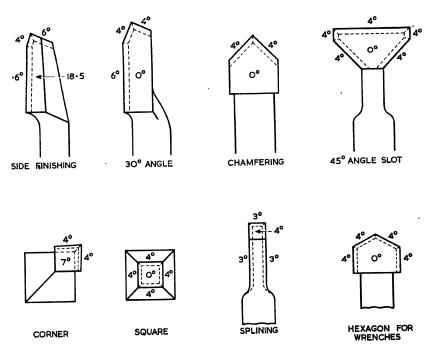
Correct clearances and cutting angles for solid or one-piece slotter tools
